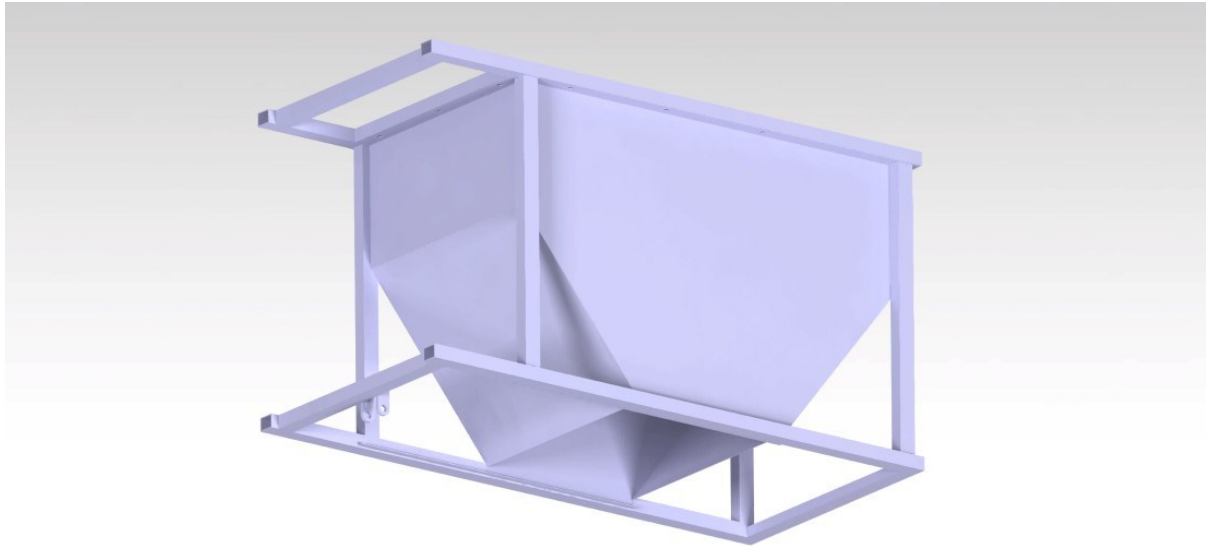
Lower part of the collecting bin box. The frame made of steel beams also supports the hydraulic cylinder for opening the floor gate, and the floor gate.
